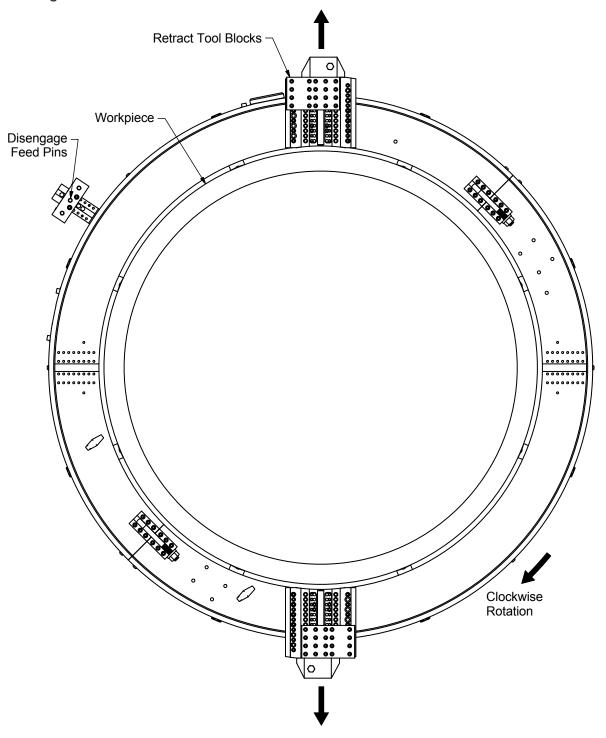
Retract Tool Blocks, Disengage Feed Pin
